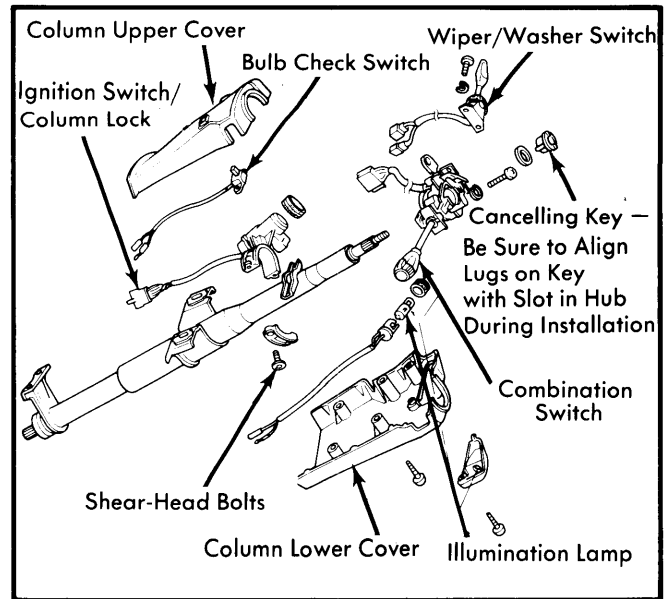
Disassembled View of Upper Column Components — Accord Shown; Others Similar
